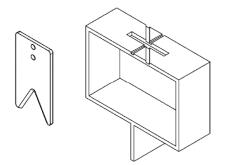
Cutting blades device and a view of fixture that used for fixing samples
